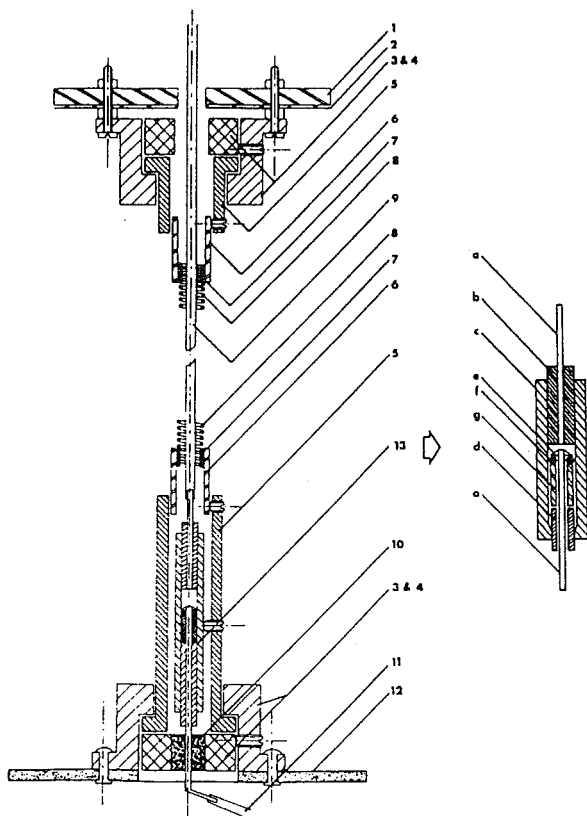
Tethering system and swivel: 1) Sheet of stainless steel; 2) Grating of the cage; 3 and 4) Integral pieces; 5) Swivelling part; 6) Stainless steel tubing; 7) Soldering; 8) Spring; 9) Polyethylene tubing; 10) Glue; 11) Silastic tubing; 12) Leather; 13) a—20 gauge stainless steel tubing, b—Plastic tube i.d. 0.635 mm, c—Plastic tube i.d. 2.286 mm, d—Plastic tube i.d. 1.016 mm, e—Dental cement, f—Rubber gasket, g—Plexiglas tubing i.d. 1.016 mm.
